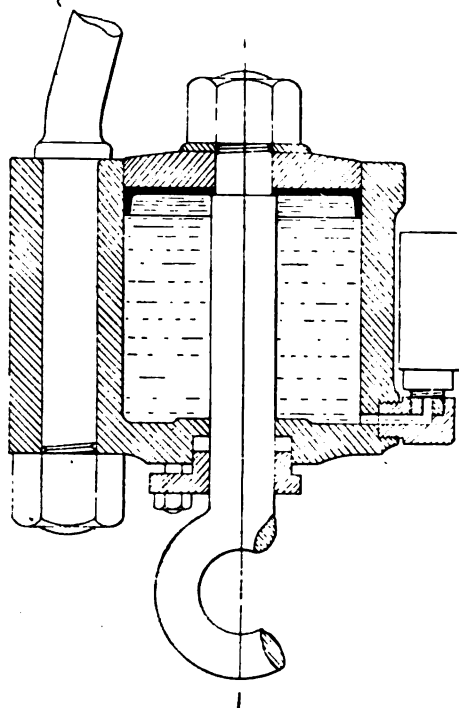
“Duckham” Hydrostatic Weighing Machine.
